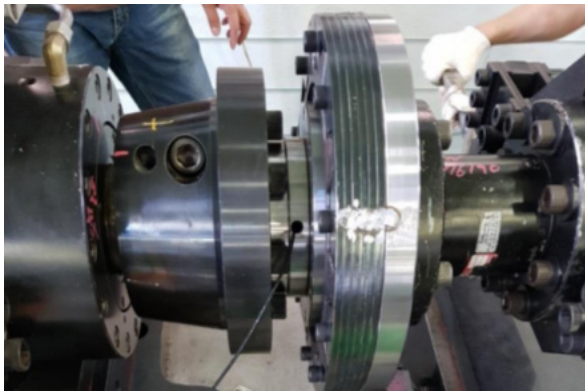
A photo of calibration test of strain gauge installed sprocket
